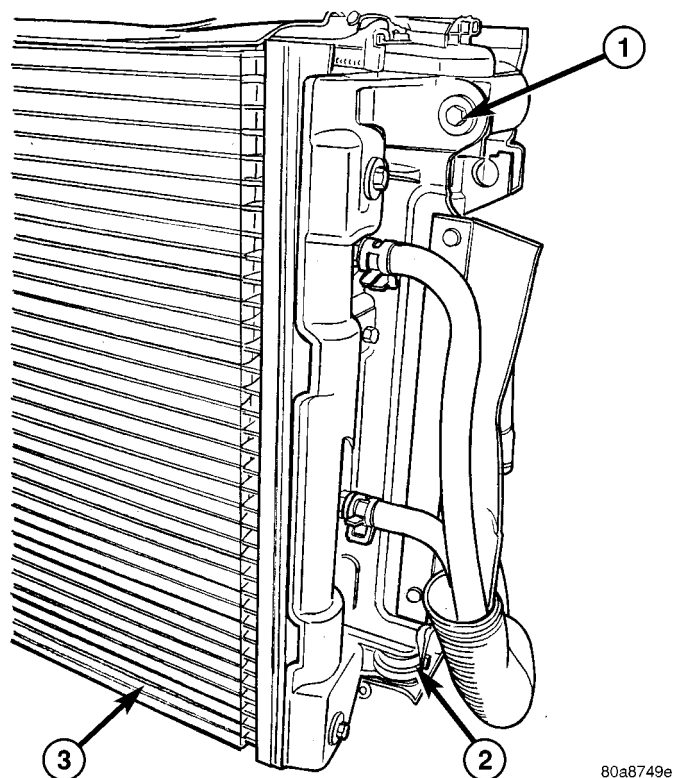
A/C Condenser – 2.5L/2.8L Diesel Engines
